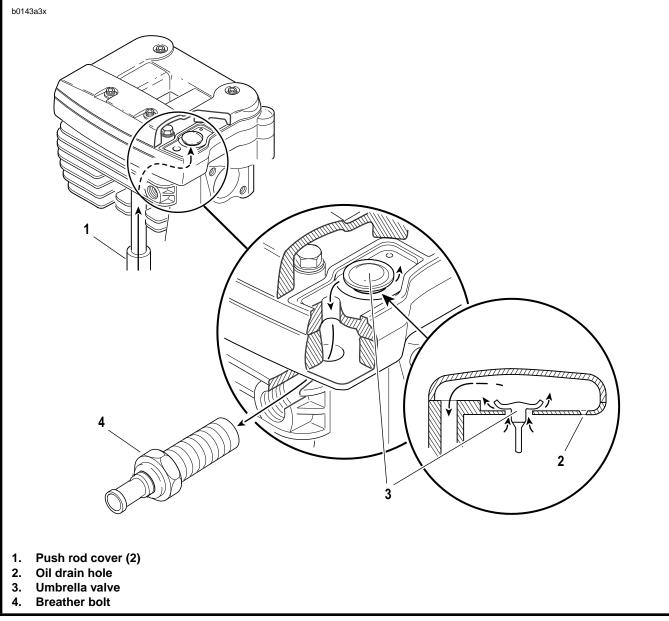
Crankcase Breathing System – Typical Cylinder
